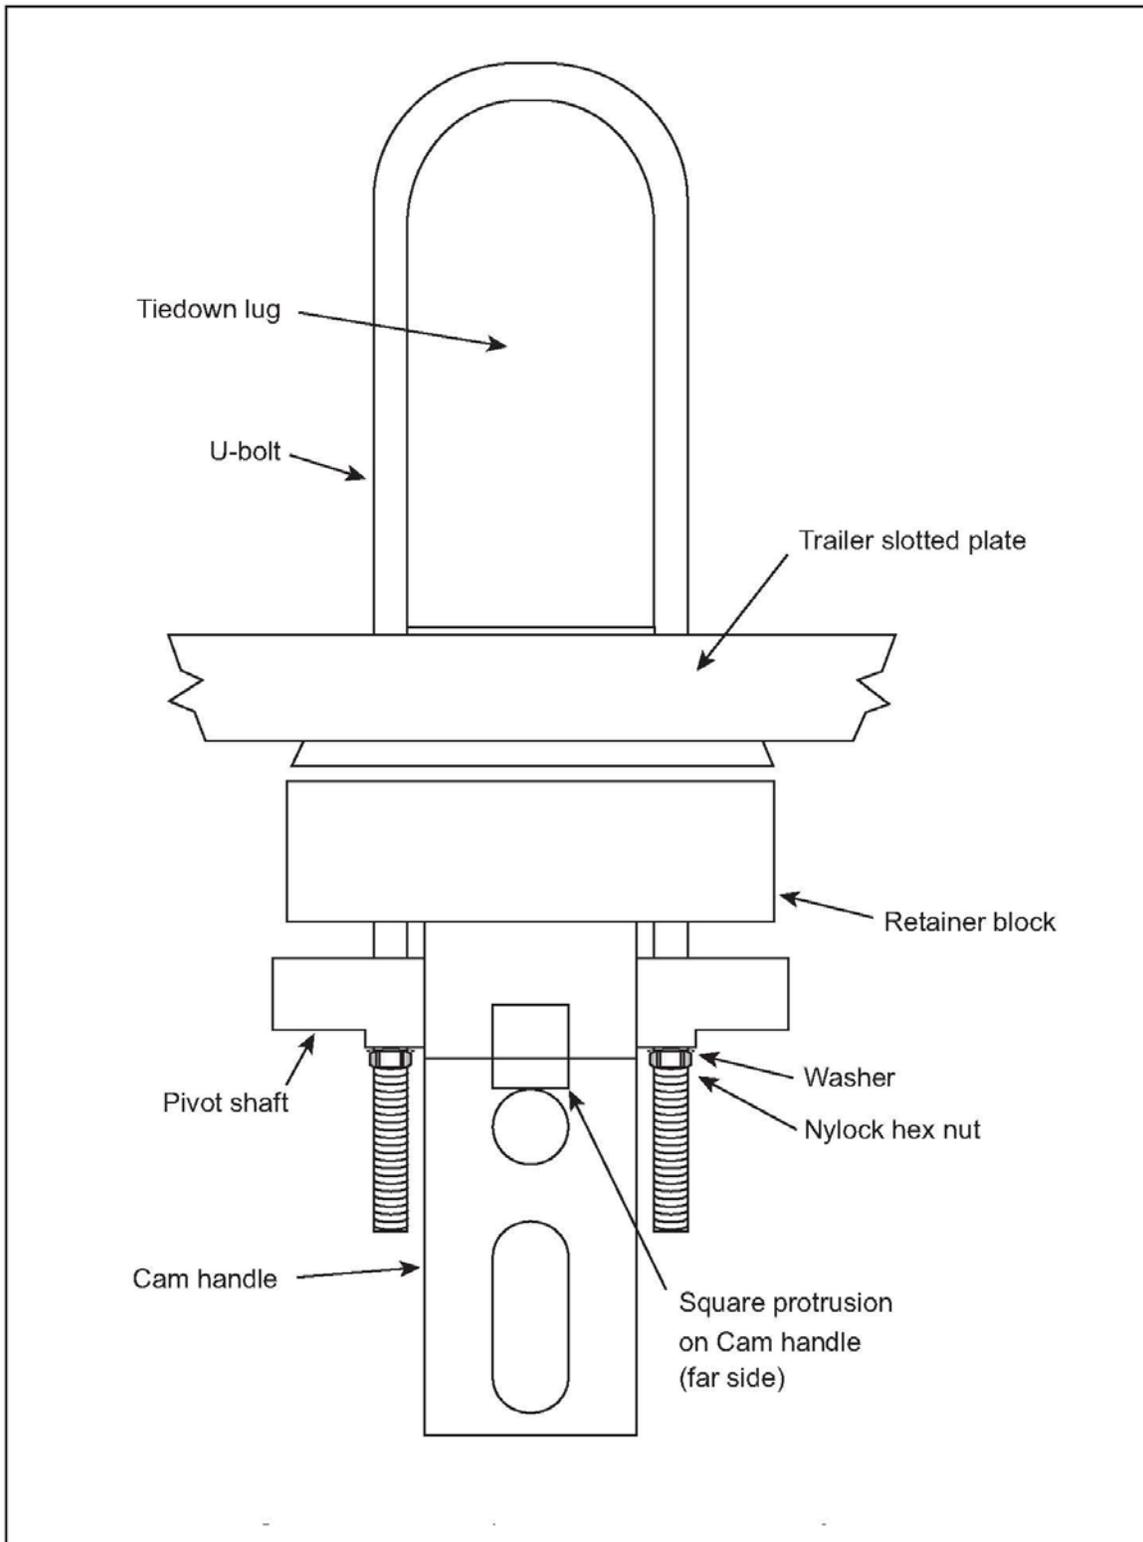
Complete Cam Handle Tiedown Assembly
